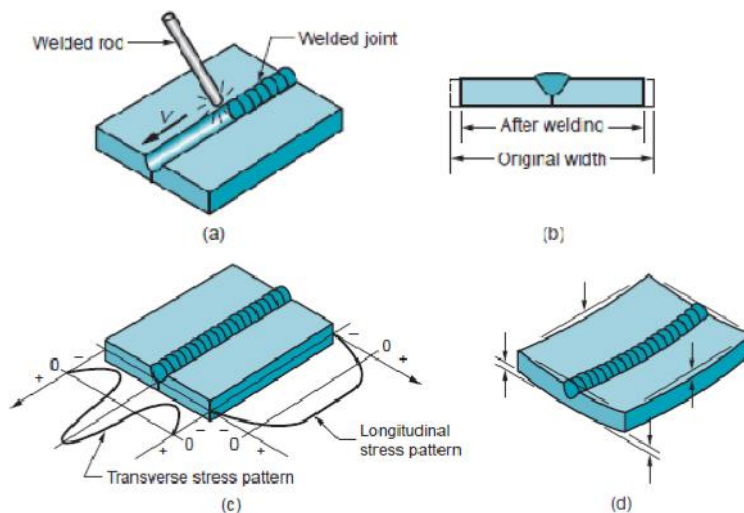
FIGURE (a) Butt welding two plates; (b) shrinkage across the width of the welded assembly; (c) Transverse and longitudinal residual stress pattern; and (d) likely warping in the welded assembly.
